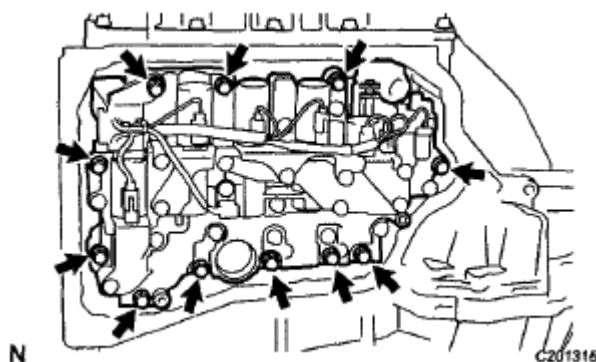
Locating Transmission Valve Body Assembly Bolts
